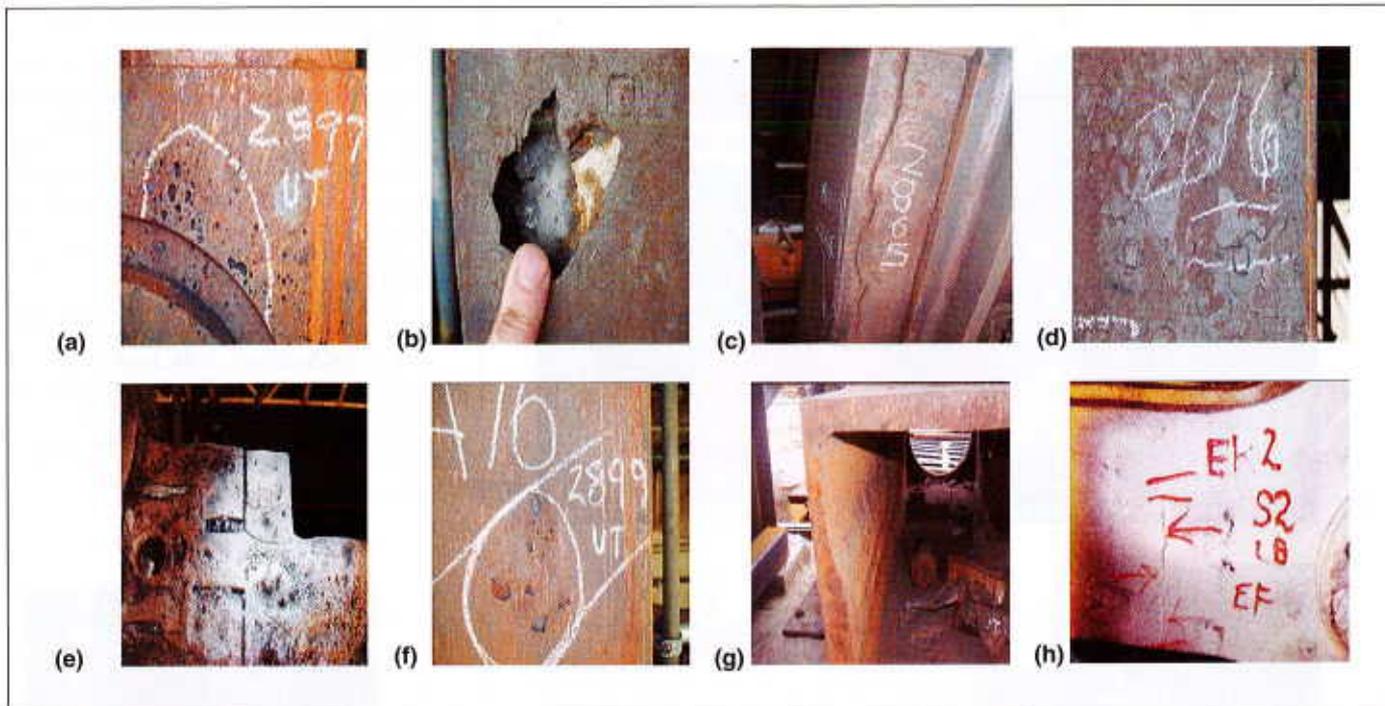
Original casting and forge discontinuities: (a) gas porosity and holes; (b) gas entrapment; (c) cold shuts; (d) unfused chills; (e) hot tears; (f) sand inclusions; (g) uneven wall thickness; (h) lack of weld fusion.
